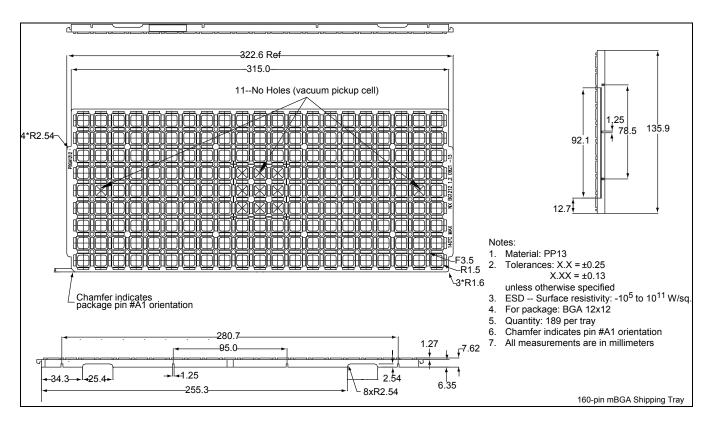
BP 160-Pin FPBGA Shipping Tray Dimensions
